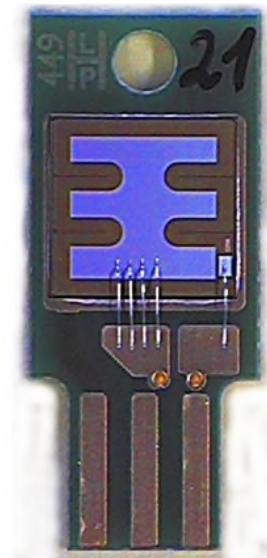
Die mounted on PCB for TID testing – soldered and wire-bonded
